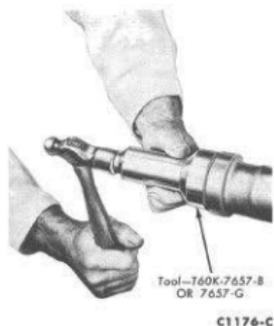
Removing Bushing and Seal From Extension Housing
